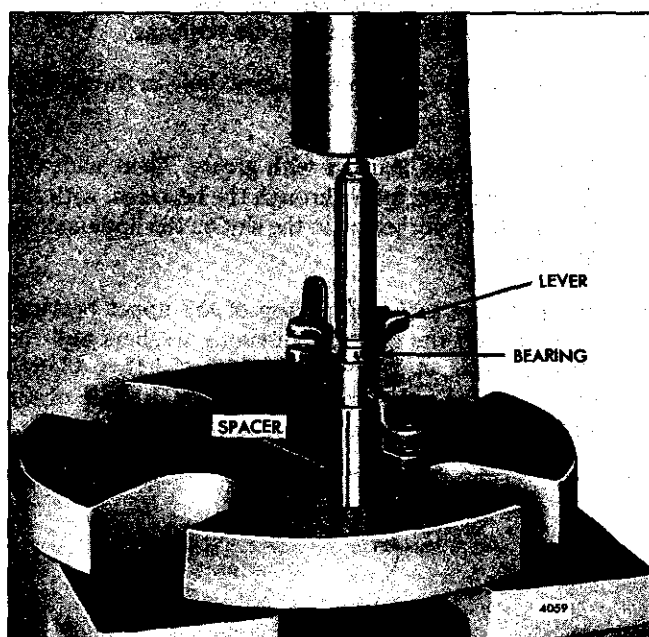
Installing Bearings in Control Link Lever Using Tool J 21068
